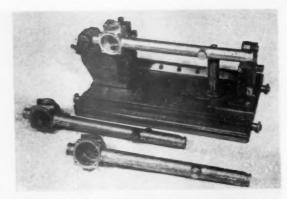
4 h.p. Renault steering box fixed on transfer machine platen.
